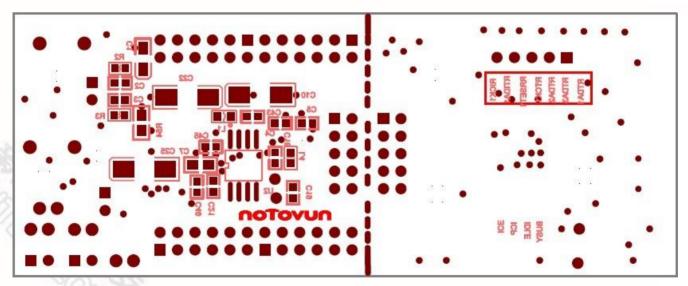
The bottom placement of Nutiny-SDK-AU9110 PCB.
